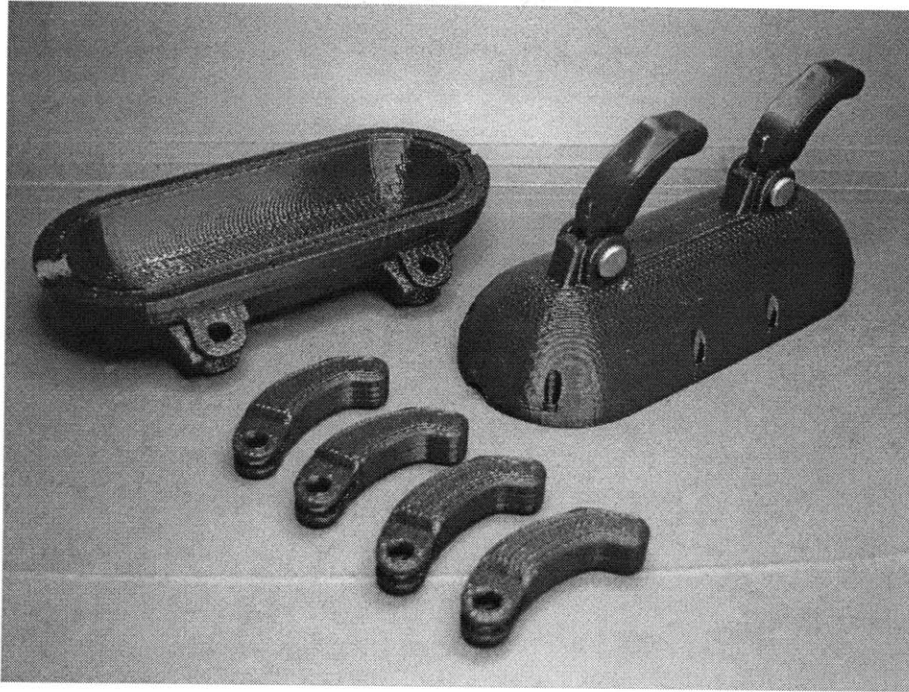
The 3D printed parts of the mobility module. Material is ABS plastic.
